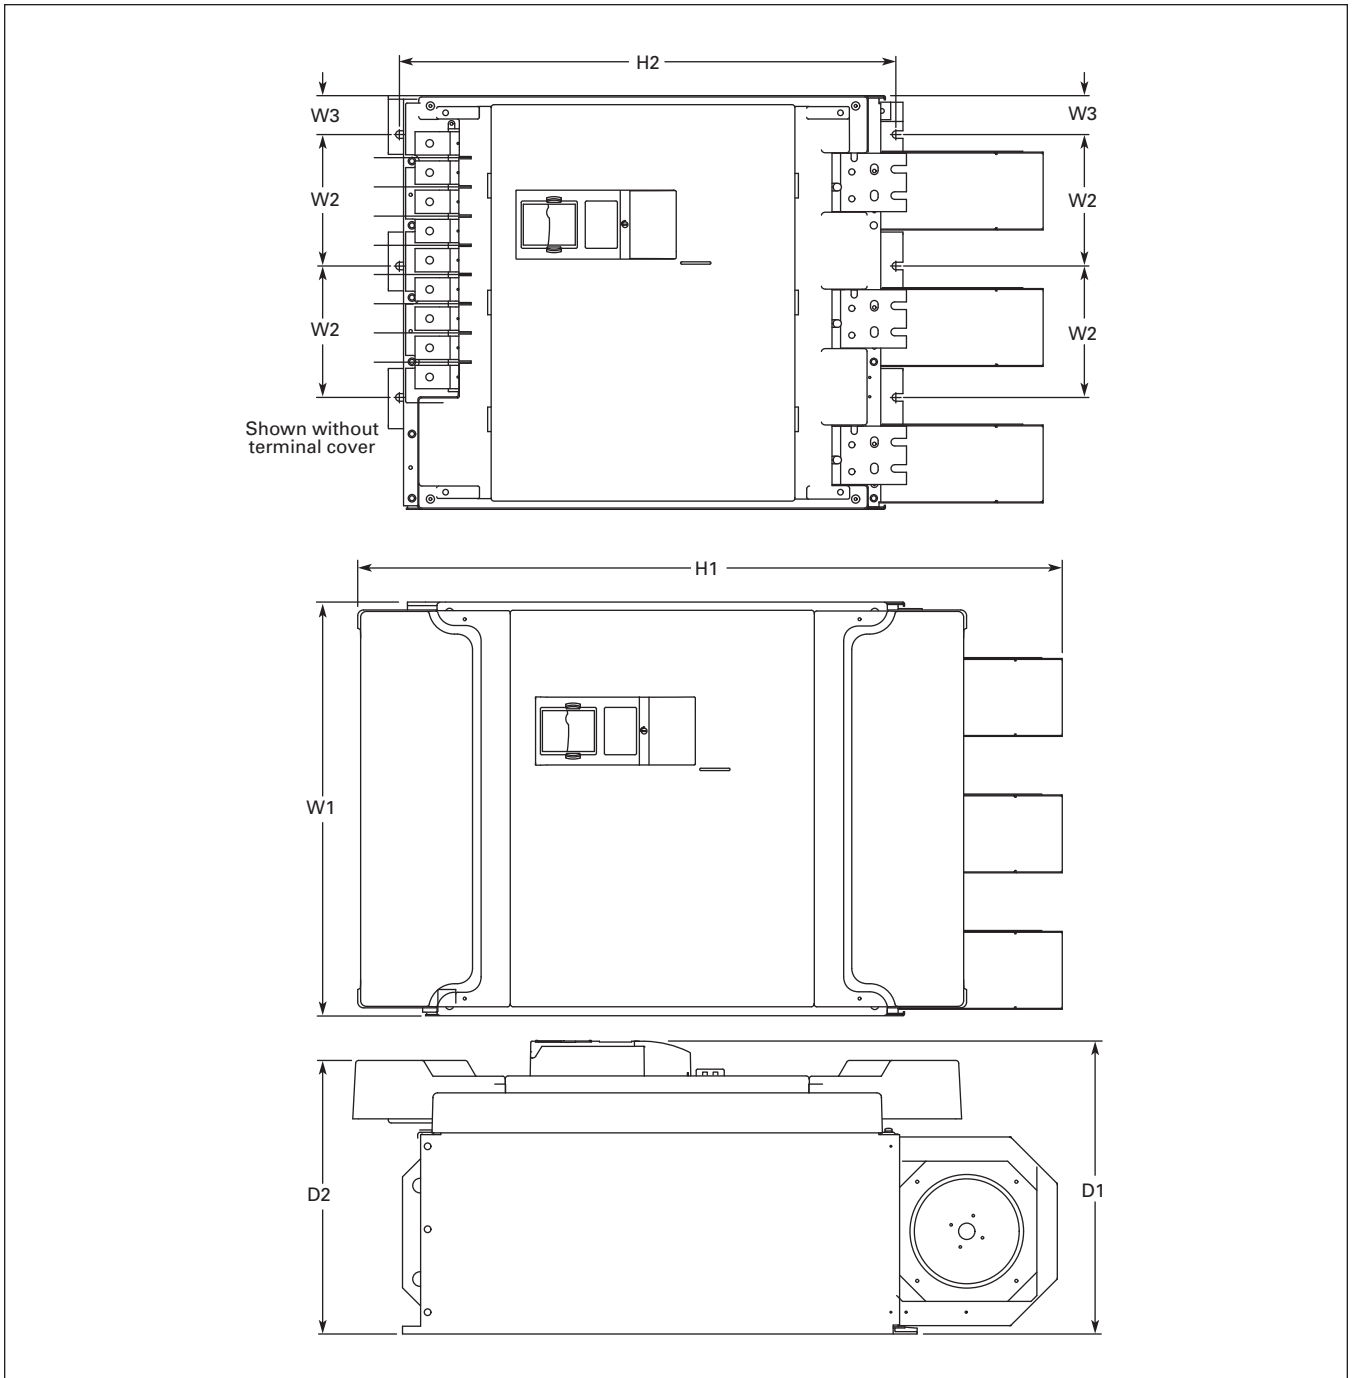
SPX9000 Dimensions, FR11 Open Chassis
